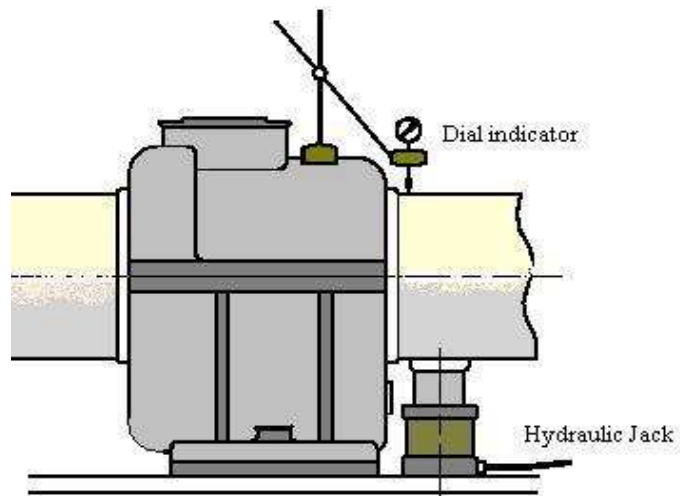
Bearing load measurement at intermediate shaft bearing
